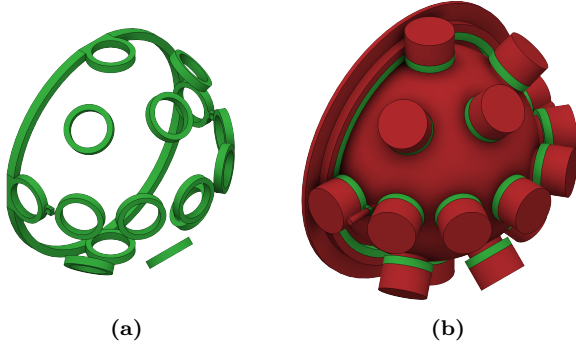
Cross-sectional view of the clip-in mechanism for mounting transducers in the cup.
